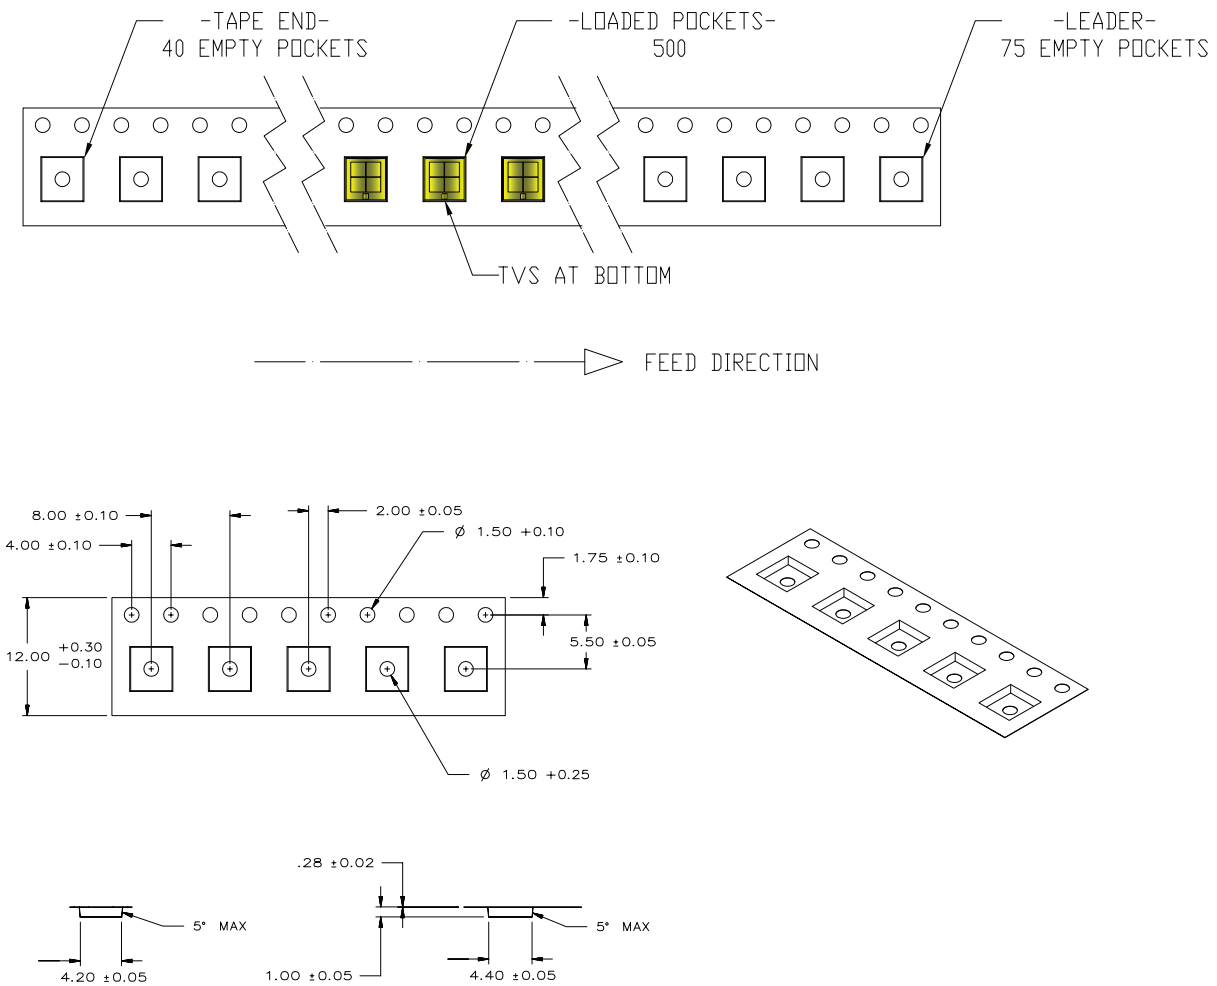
Pocket Tape dimensions for LUXEON MZ.
